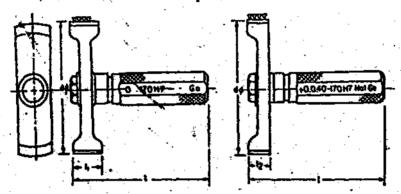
Flat type Go and Not-Go plug single ended gauges (Reproduced from IS:3484)
